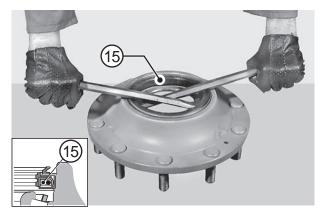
Remove seal ring (15) from wheel hub (7).
